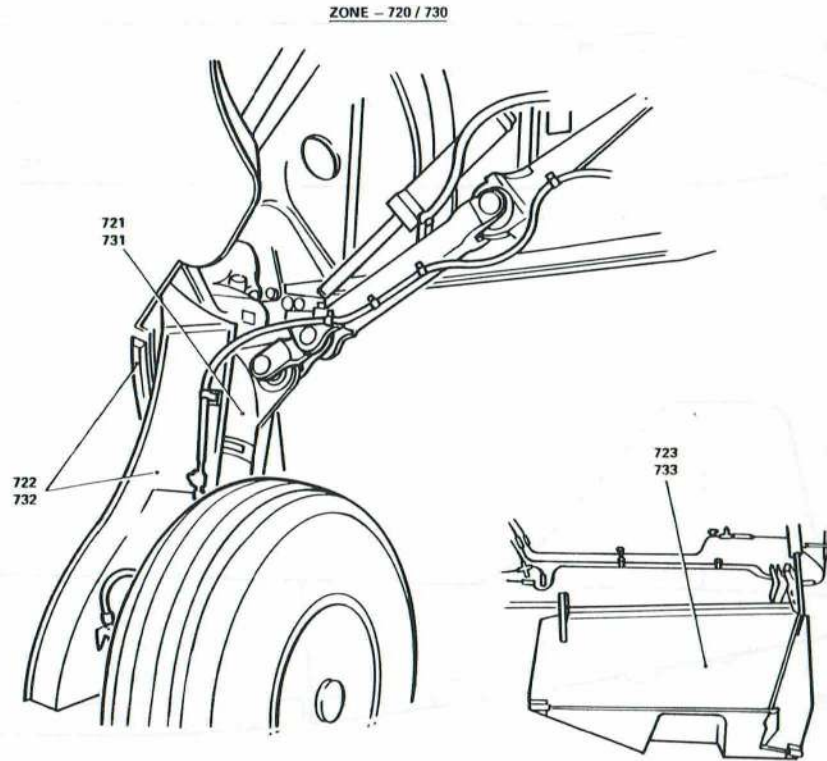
MAJOR ZONES - LANDING GEAR AND DOORS
